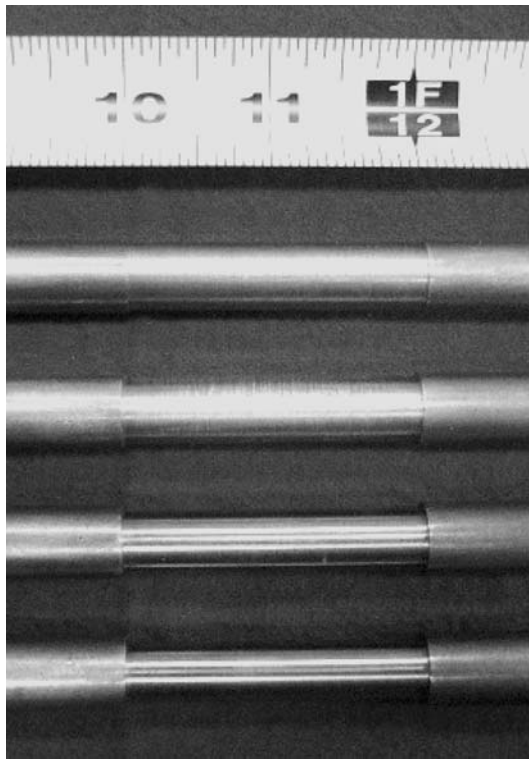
Appearance of AISI 1045 steel rods that were machined
